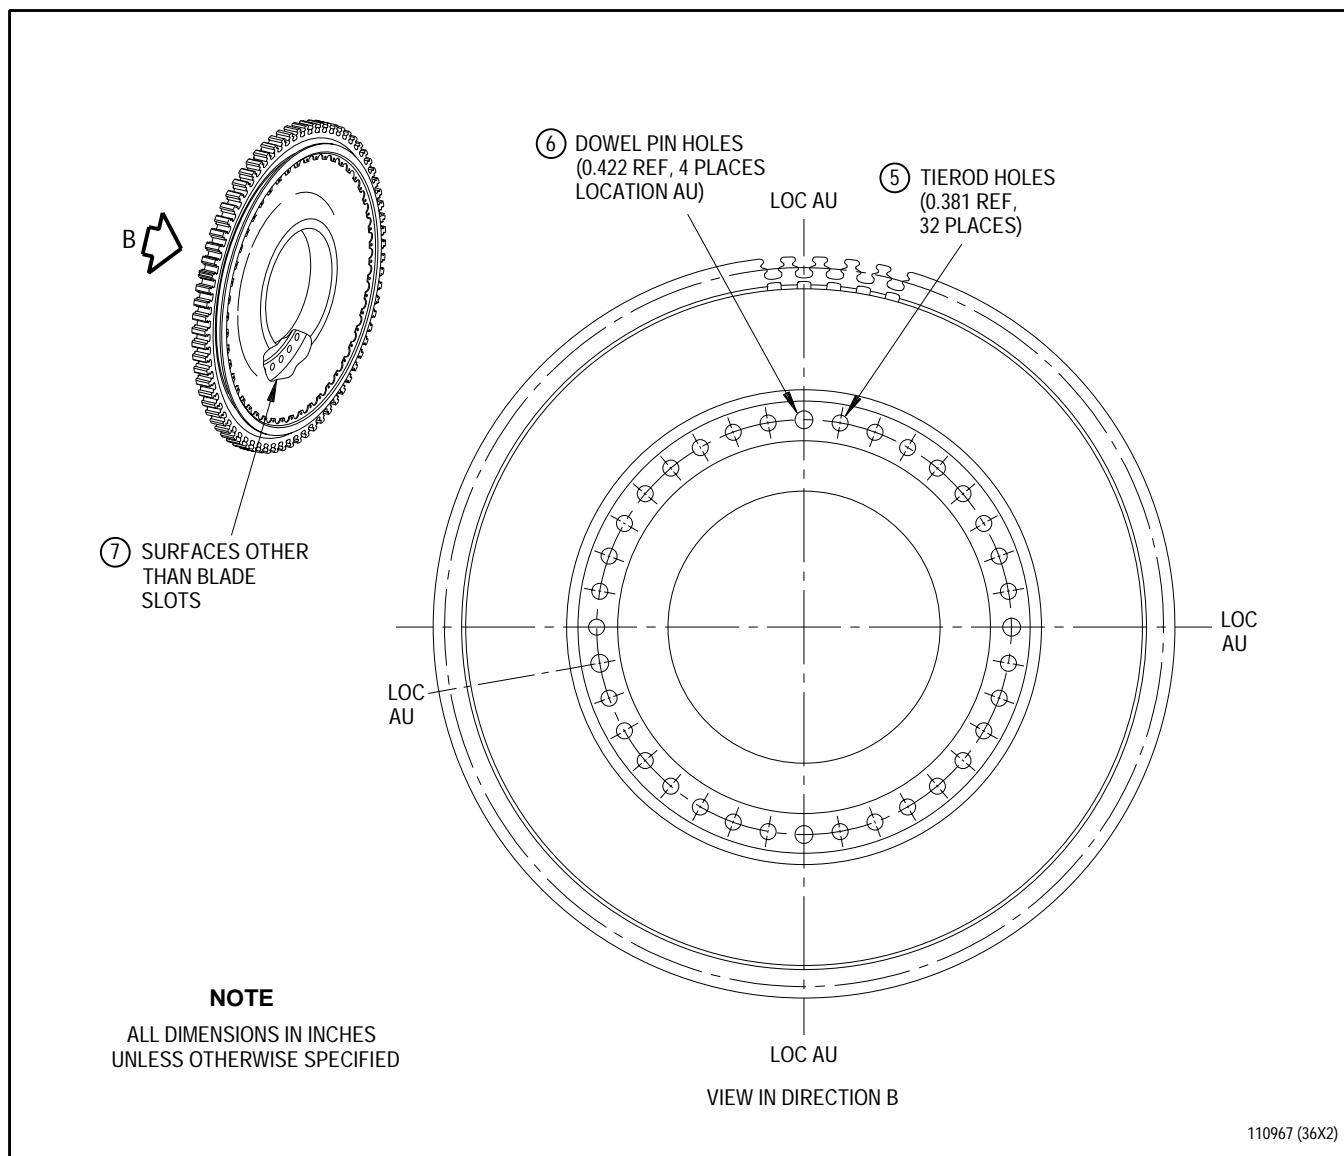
Second Stage Turbine Disk - Inspection (Sheet 2 of 3)
